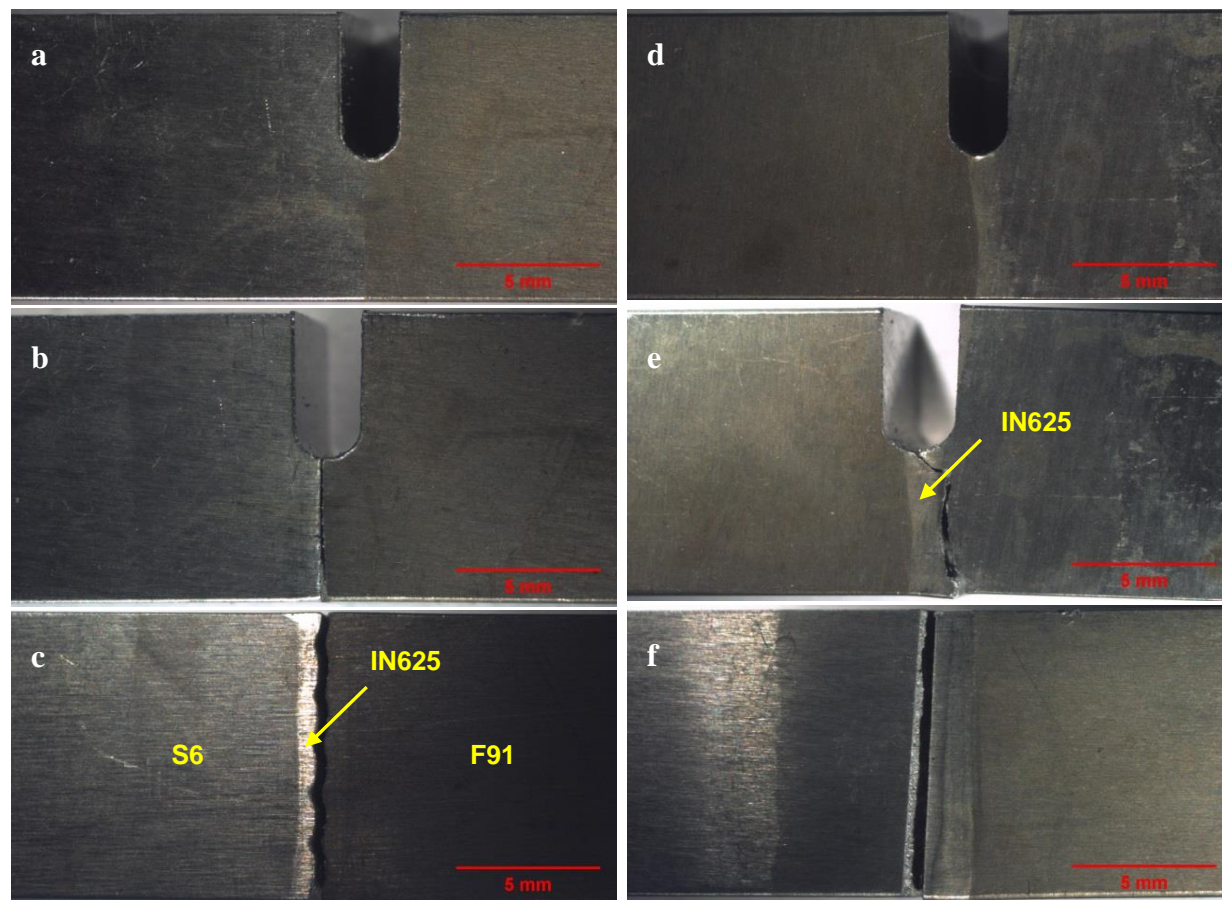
IN625 Charpy specimens after aging at 650 °C for 8760 h: showing fracture along the F91/IN625 interface (a) before fracture, (b) cross-section and (c) back-face after fracture; showing fracture in the IN625 (d) before fracture, (e) cross-section and (f) back-face after fracture.
